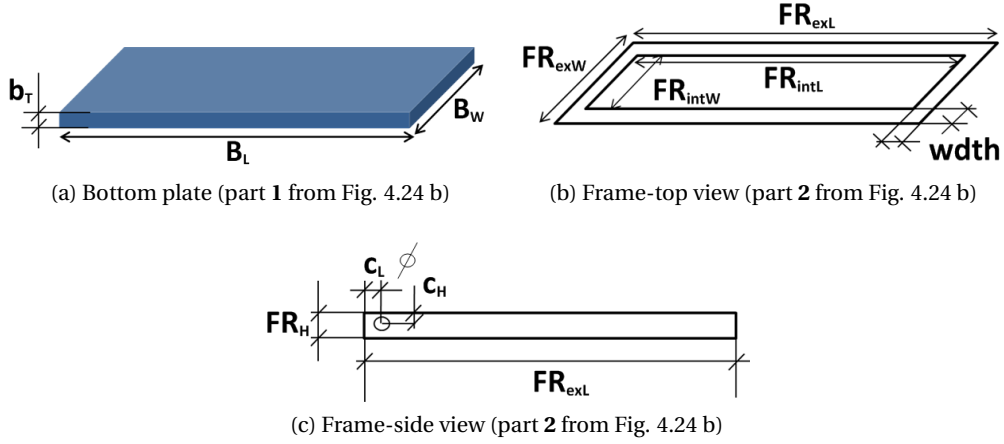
2D sketches of the designed mold: (a) Bottom plate, (b) Frame - top view and (c) Frame - side view.
